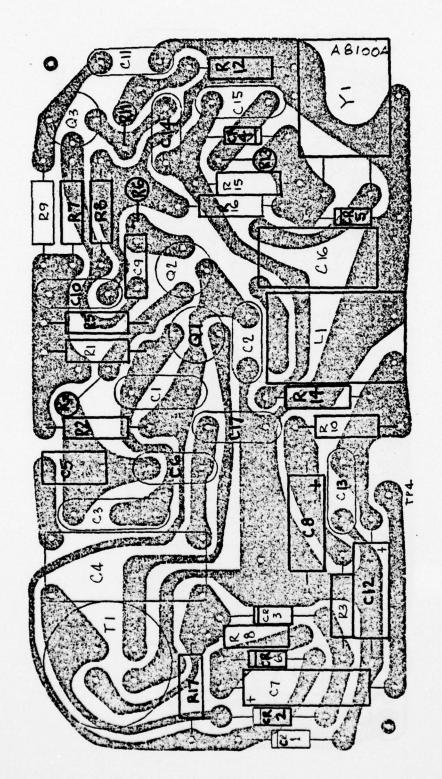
P.C. BOARD LAYOUT FOR THE A8100A TRANSMITTER 11.5 MHZ MODULATOR ASSEMBLY
